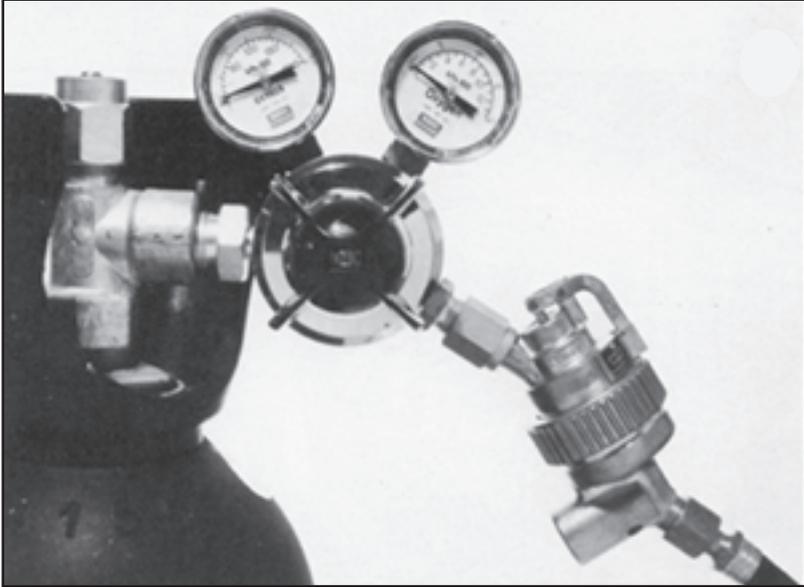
A typical set-up showing oxygen cylinder, cylinder valve, regulator with gauges and a flashback arrestor.
